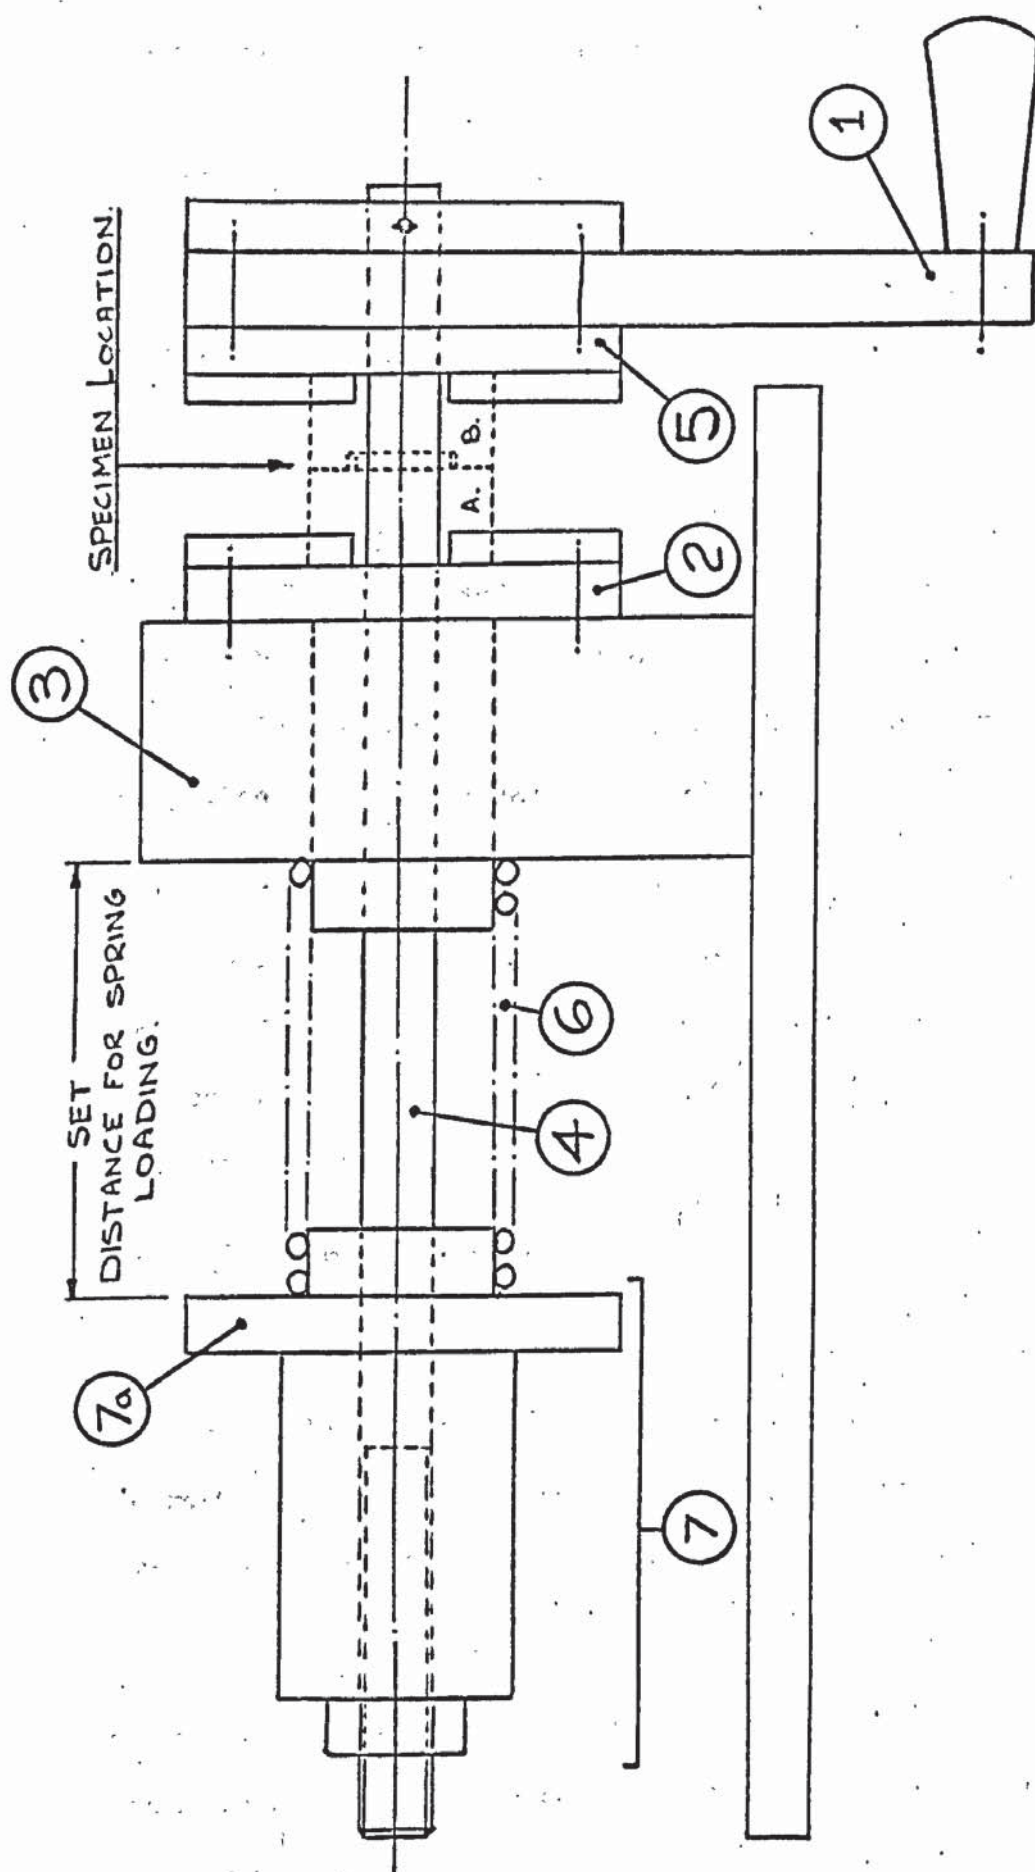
TEST FIXTURE FOR SPECIMEN.
